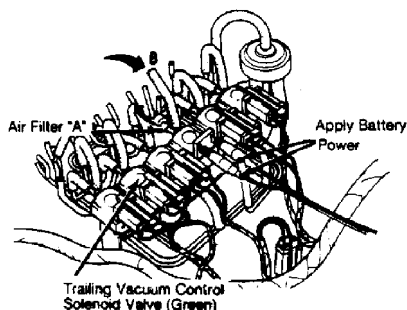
Testing Trailing Vacuum Control Solenoid Valve
